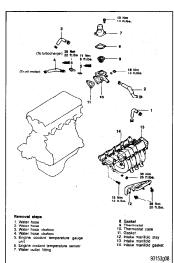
Exploded view of the intake manifold and related components—1.6L and 2.0L DOHC engine
